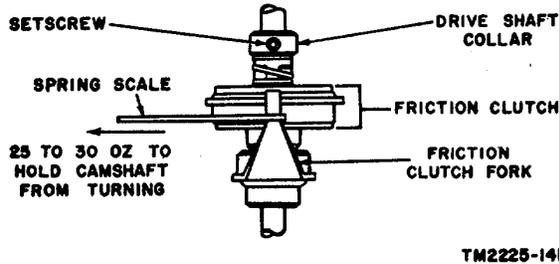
Transmitter-distributor friction clutch adjustment (TT-76/GGC).
